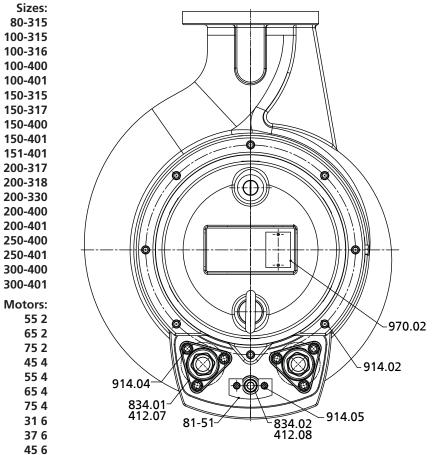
Motor and fastening elements for the cable glands Amarex KRT, motor type 3, three power cables
